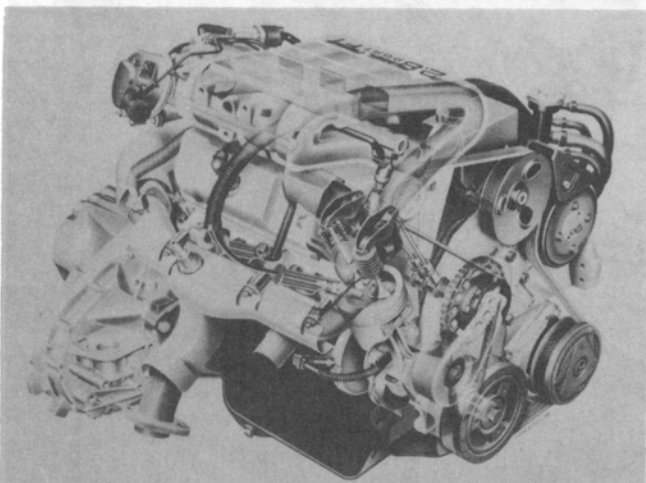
Generation II V6/60 Chevrolets have aluminum cylinder heads with canted valves, a tuned two-piece intake manifold, and an aluminum front cover.
